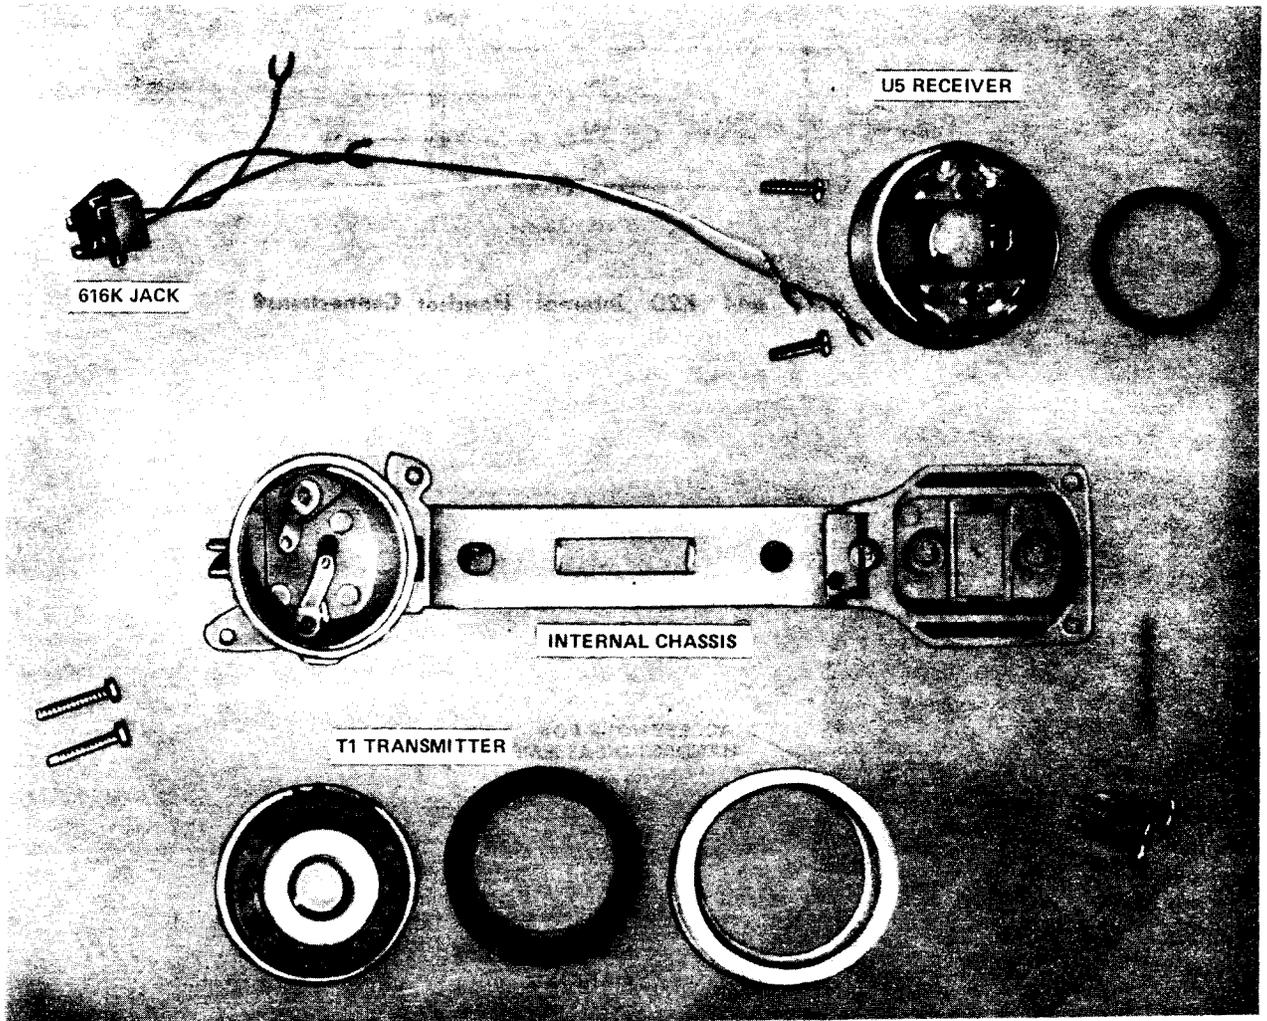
K2A and K2C Modular Handset Breakdown of Inner Chassis
